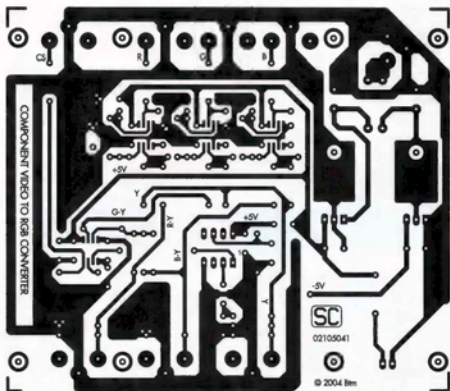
the full-size etching pattern for the bottom of the PC board. Check both sides of the PC board for etching defects before installing any parts.
